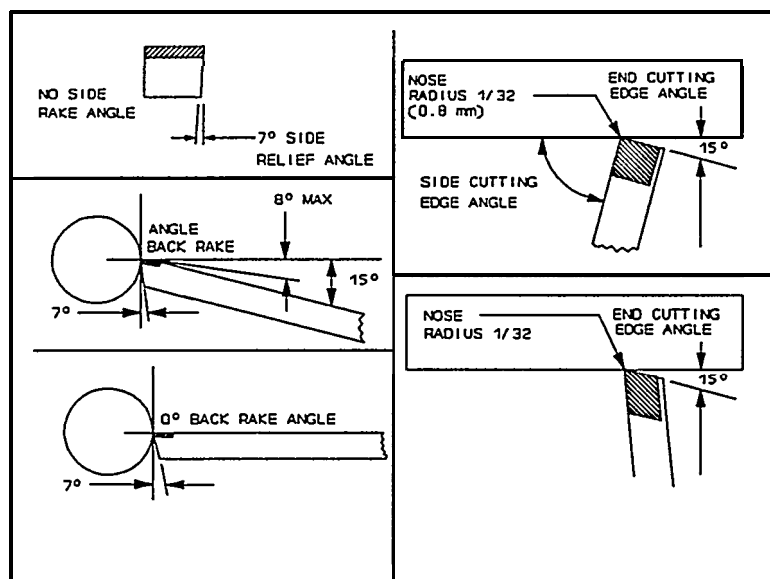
TOOL ANGLE FOR CARBIDE TOOLS
